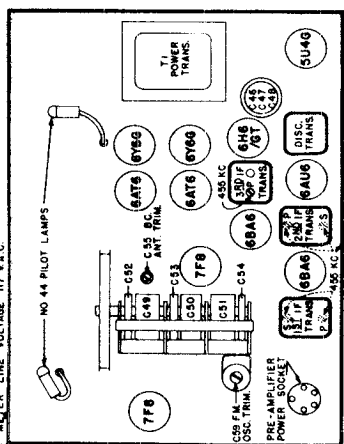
TOP VIEW OF MAIN CHASSIS
